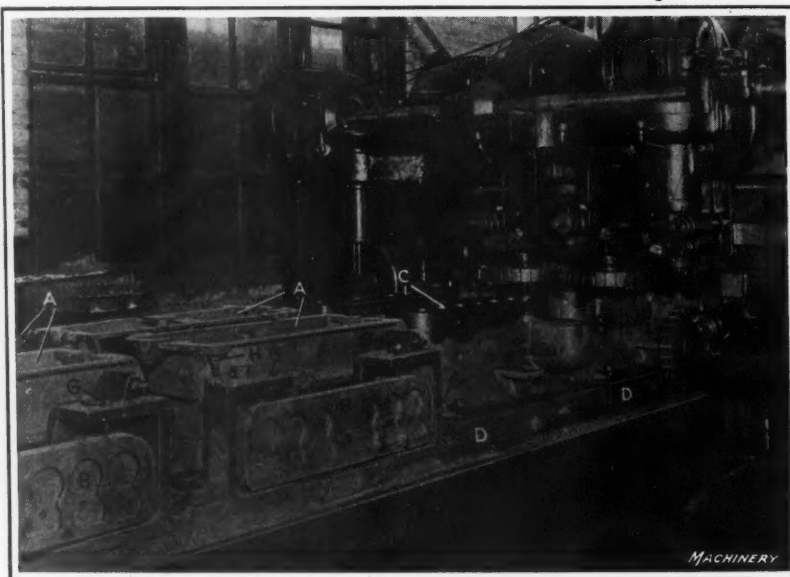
Multiple-spindle Milling Machine equipped for simultaneously milling Avery Cylinder Blocks and Heads
